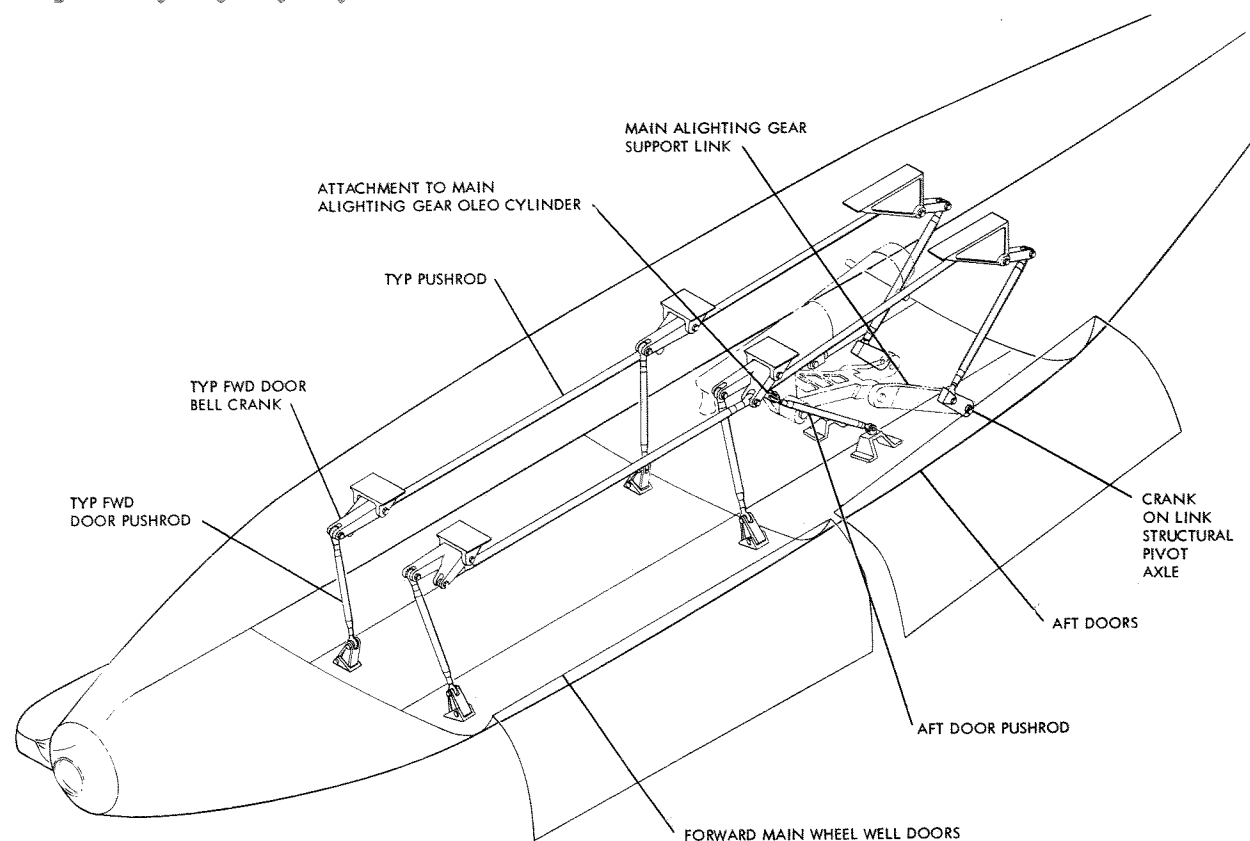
MAIN LANDING GEAR DOOR MECHANISM.
